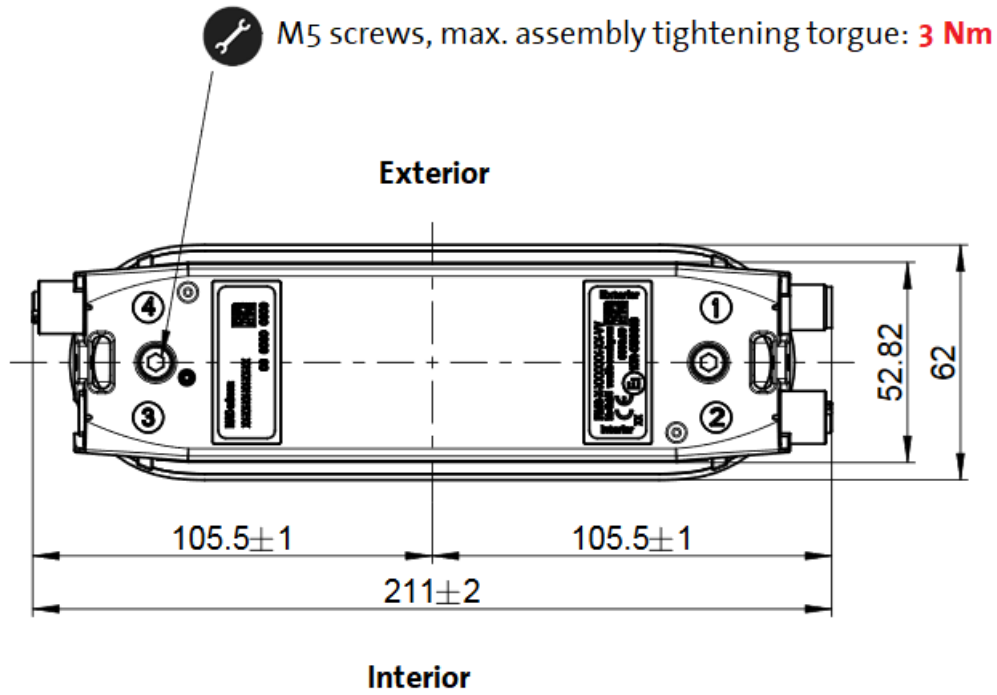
Dimensions – Bottom view IRMA6-SENSOR-HD-00-POE-IO-00
